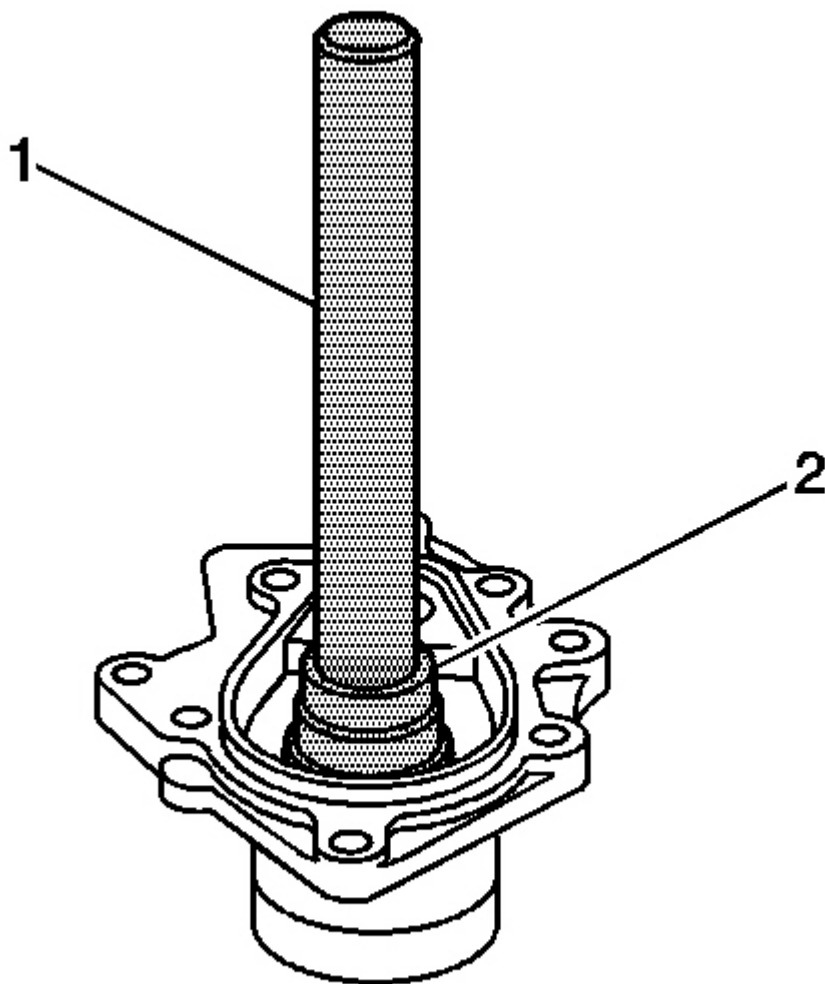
Identifying Universal Driver Handle & Differential Bearing Adjuster Needle Bearing Replacer - LH (Outer Case Half)
